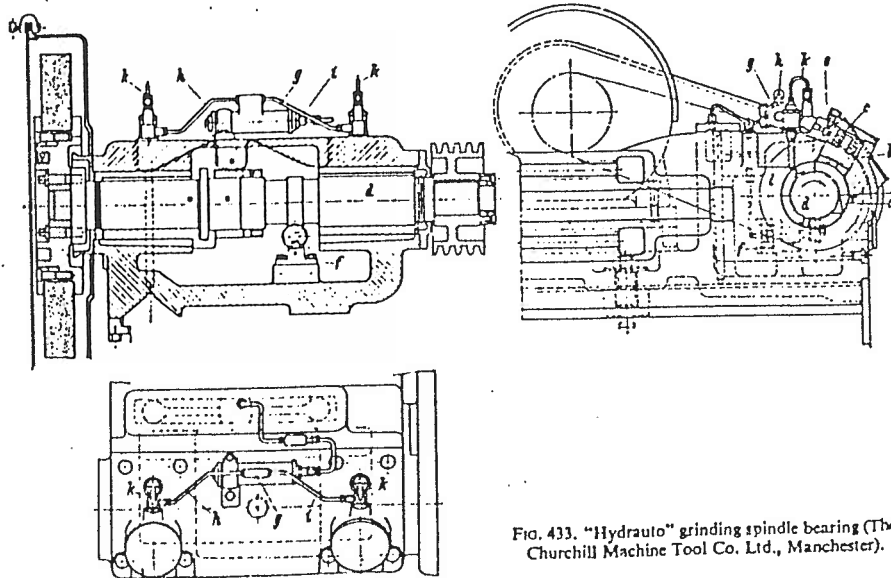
"Hydrauto" grinding spindle bearing (The Churchill Machine Tool Co. Ltd., Manchester).
